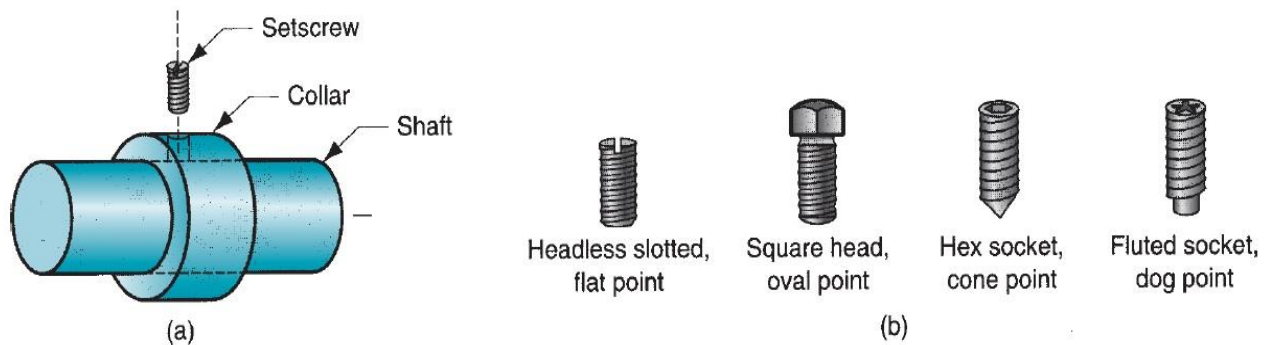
(a) Assembly of collar to shaft using a setscrew; (b) various setscrew geometries (head types and points).
